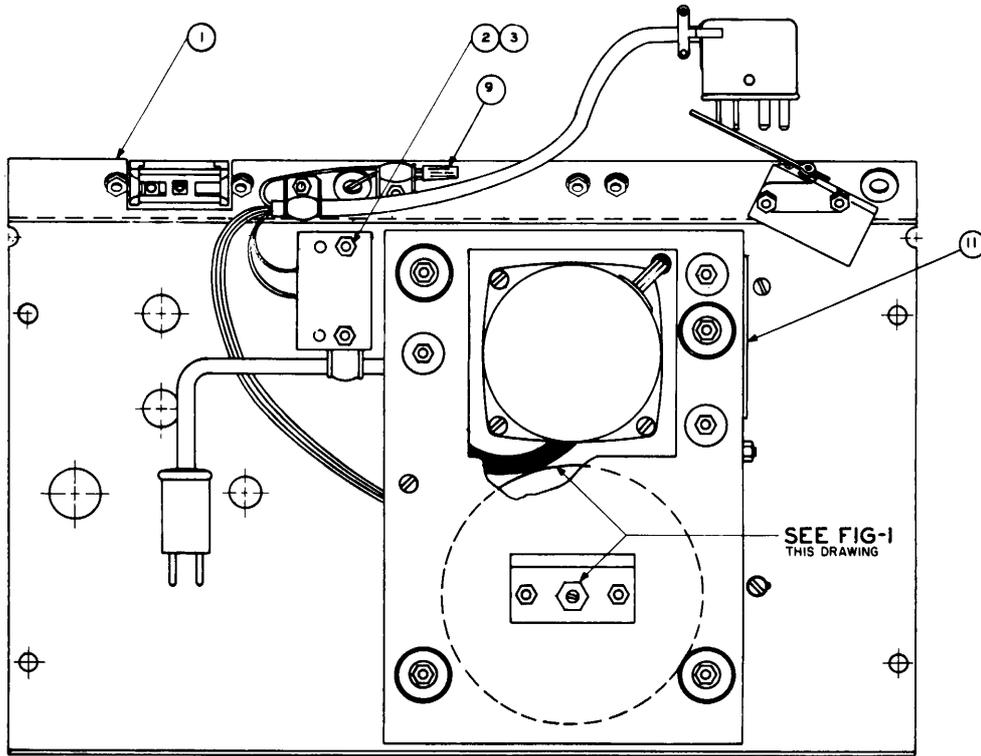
Chassis assembly, WW-5795-1D (part of wiring-chassis, figure 12).
